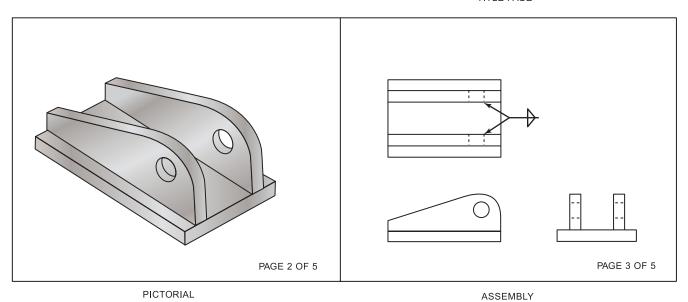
Of the two methods for locating the views, the third angle projection is the most commonly used for welding drawings.
